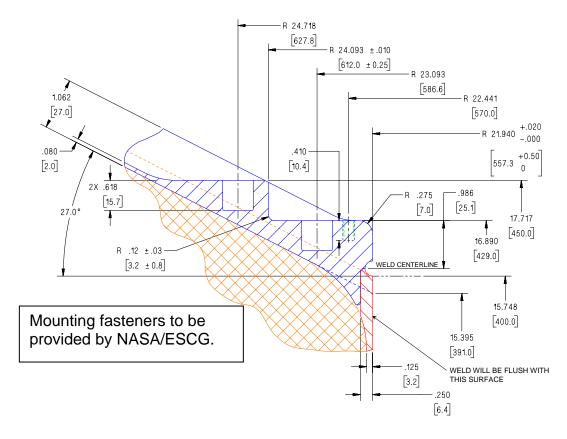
Tracker Mounting Cross-Section
